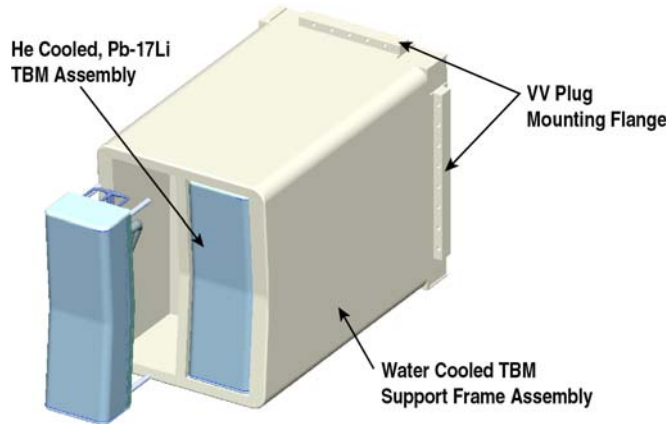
DCLL TBM assembly installed in one of the half ports.
